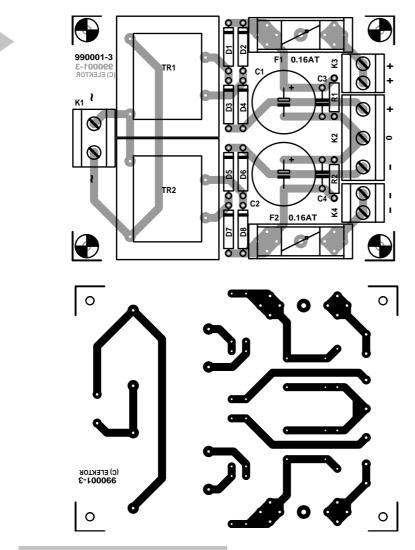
Printed-circuit board for the auxiliary power supply described in Part 1.
